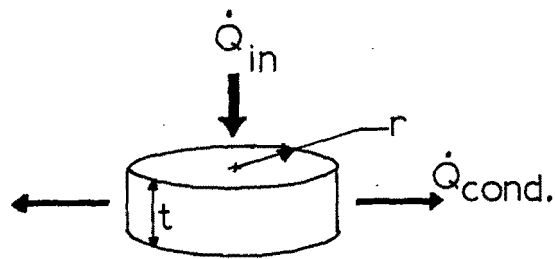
Assumed weld pool geometry for heat balance
